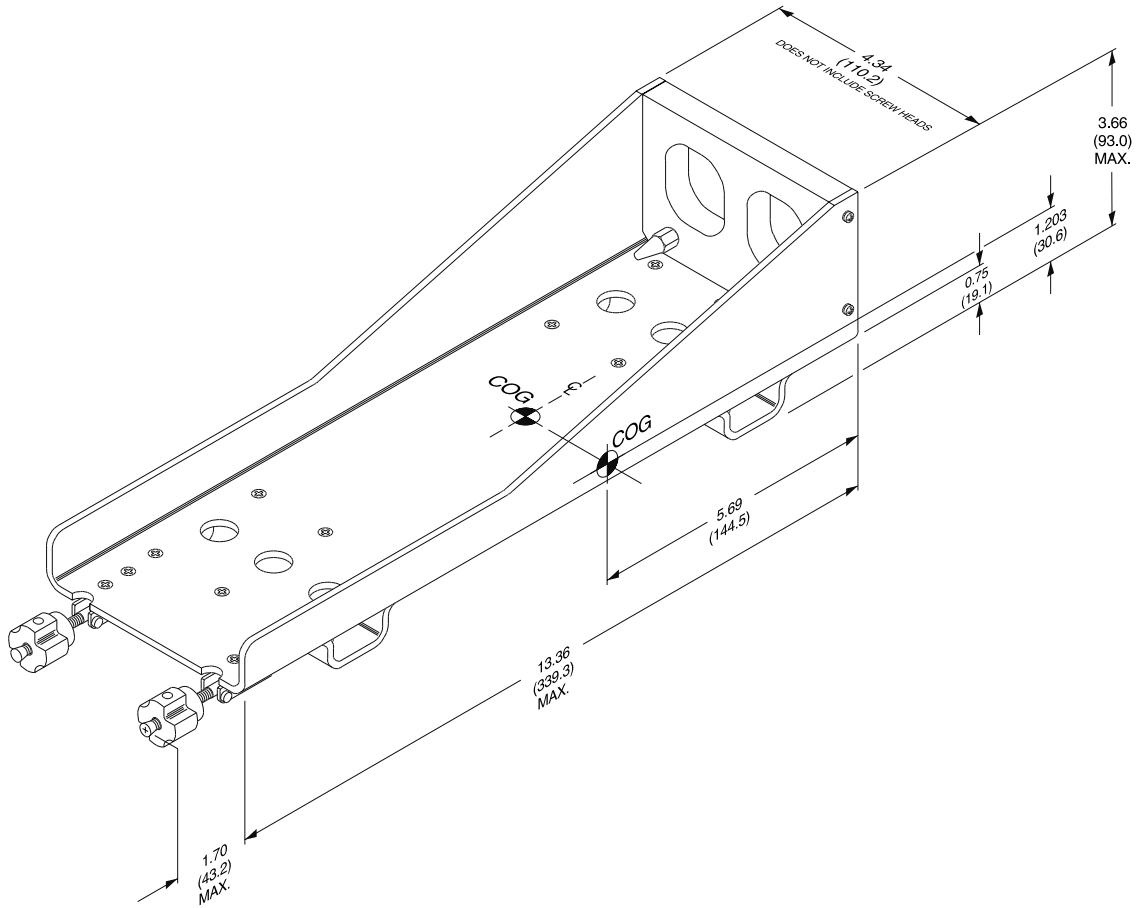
Ruggedized TRC Mounting Tray (P/N 805-10870-003)
